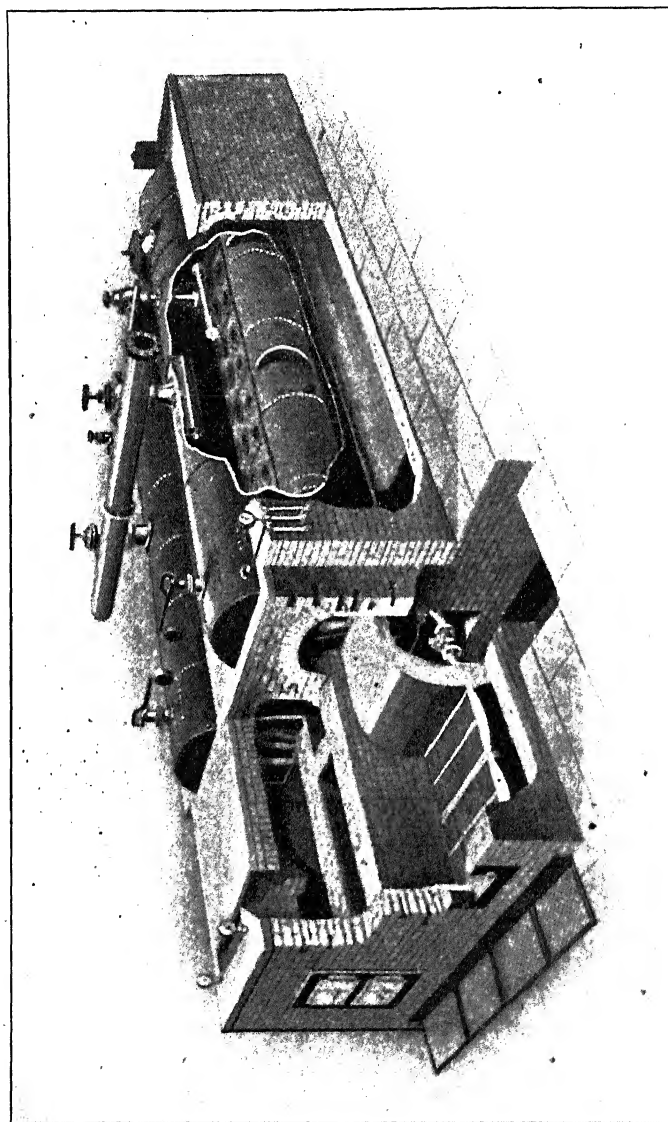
Sectional view of wood-burning Galloway boiler, showing the internal chamber full of vertical water-circulating tubes, which extend throughout the entire length of the boiler.
